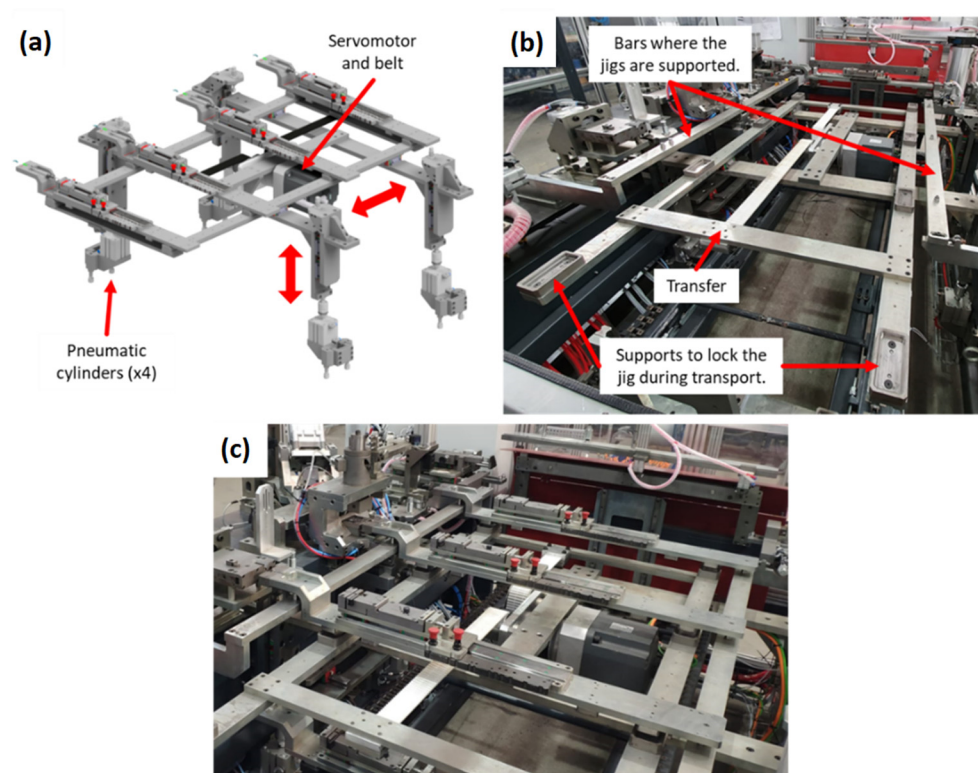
(a) Movements performed by the transfer system, (b) support bars for the equipment's jigs, and (c) jigs mounted onto the support bars.
